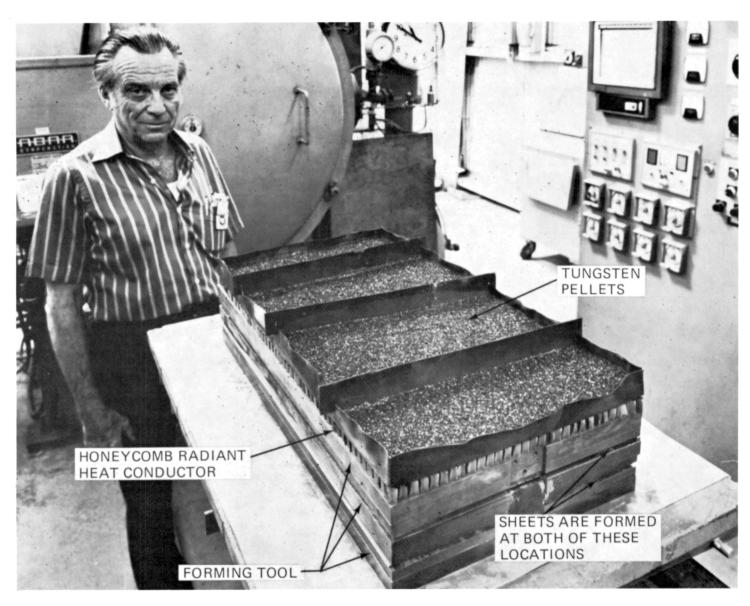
Superplastic Form Tool Ready for Loading into Vacuum Furnace
